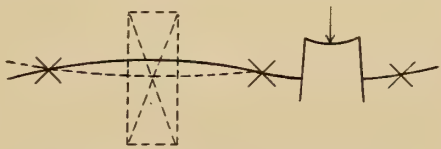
BENDING OF A CRANKSHAFT DUE TO EXPLOSIVE PRESSURE
